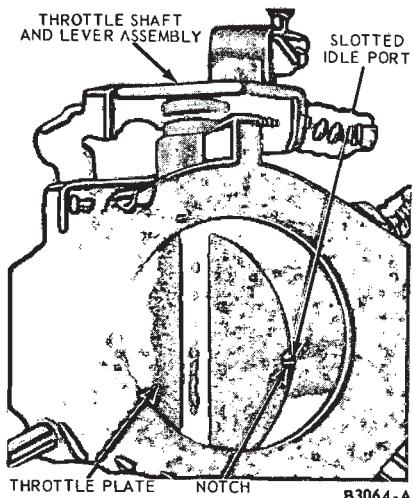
Throttle Plate Installation in Aluminum Throttle Body
